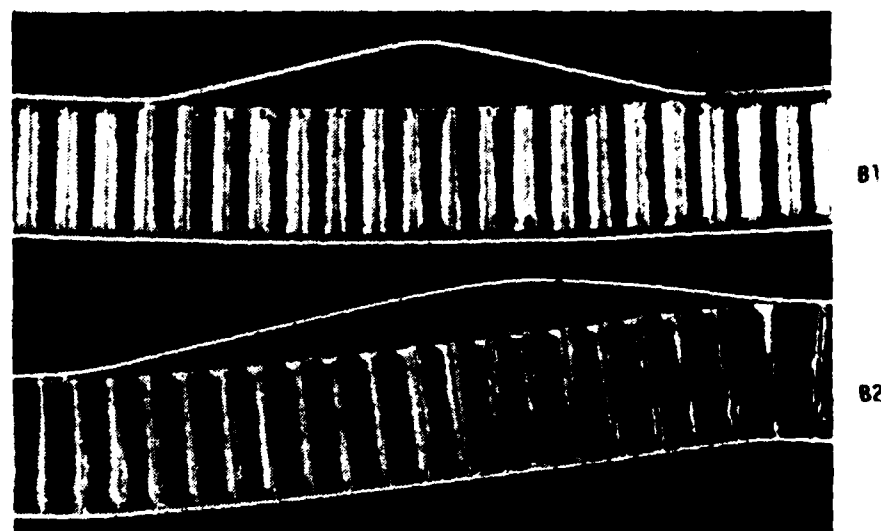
FAILURE OF A FULLY BONDED SPECIMEN
